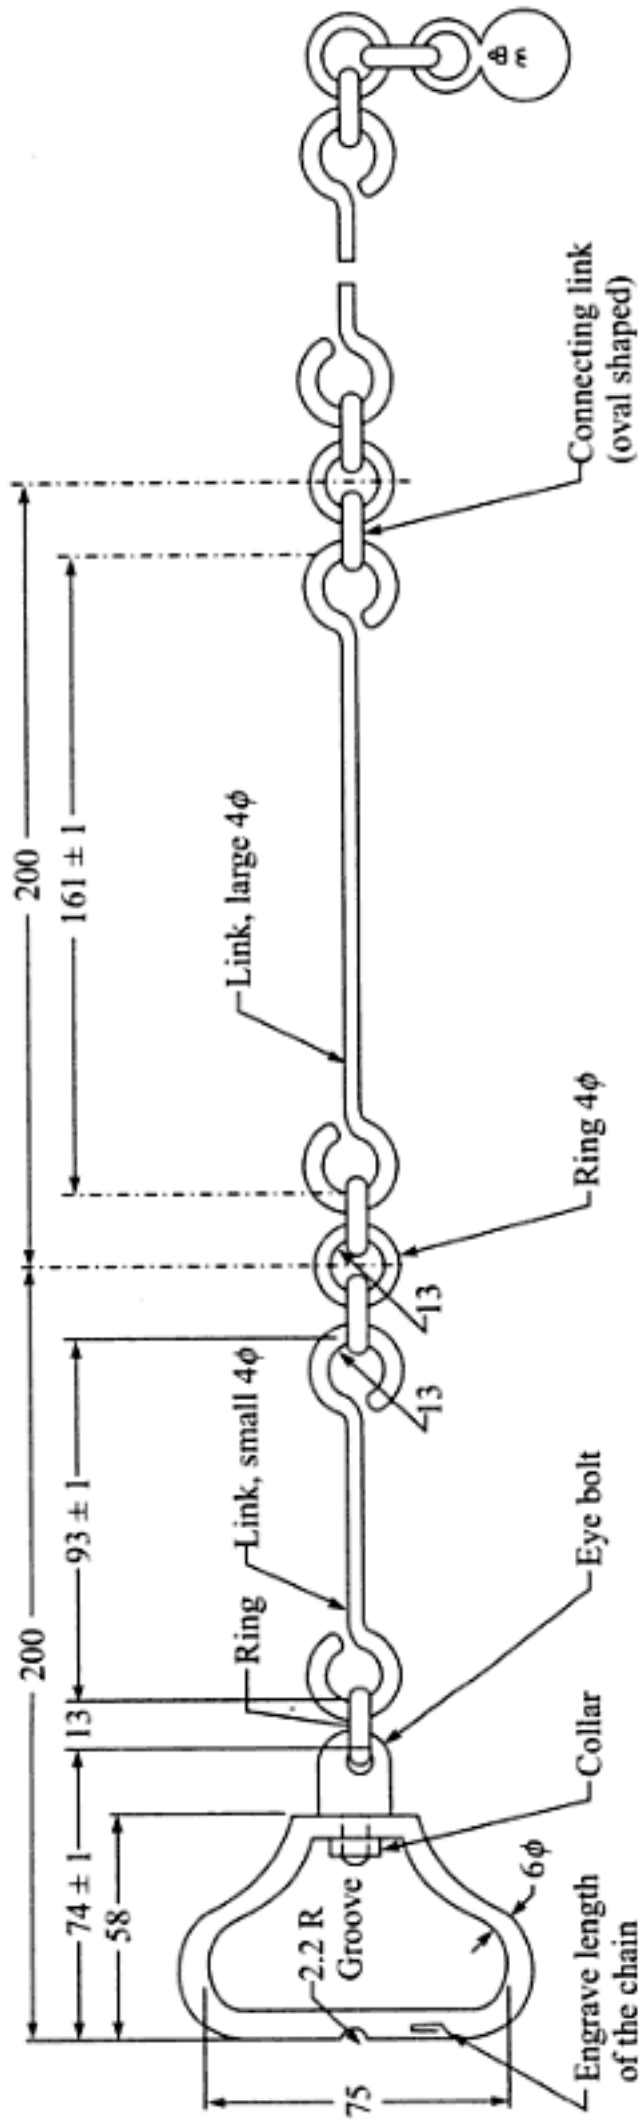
Nomenclature and dimensions of different parts of chain (all dimension in mm).
